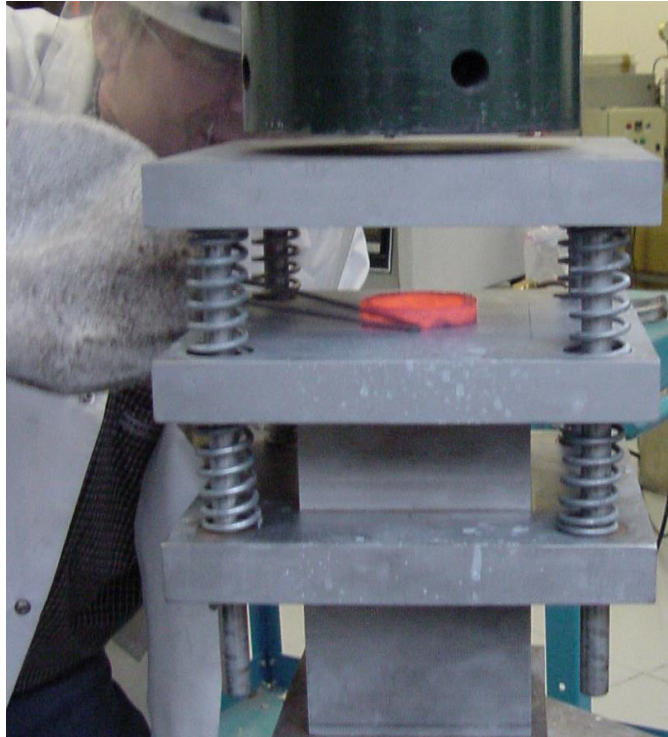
Forging operation of a ring when it is inserted in the forging tooling that was developed.
